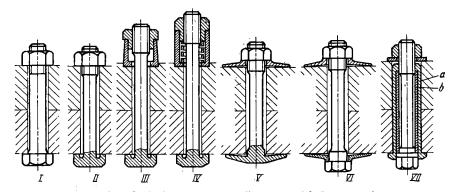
Methods for increasing elasticity of bolt assemblies *I*—rigid bolt; *II*—elastic bolt; *III*—long elastic bolt; *IV*—bolt with helical spring; *V*—bolt with elastic head and spring washer; *VI*—bolt with spring washers; *VII*—bolt with tension (a) and compression (b) sleeves
